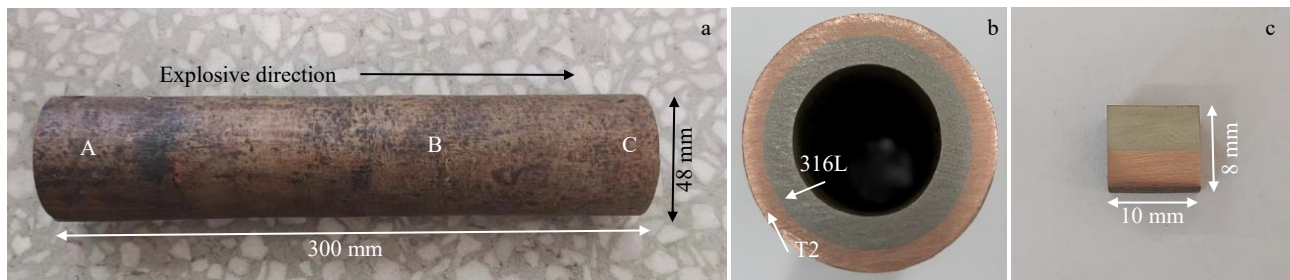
Appearances of copper/steel composite pipe: (a) side appearance; (b) cross-section appearance; (c) longitudinal-section appearance
